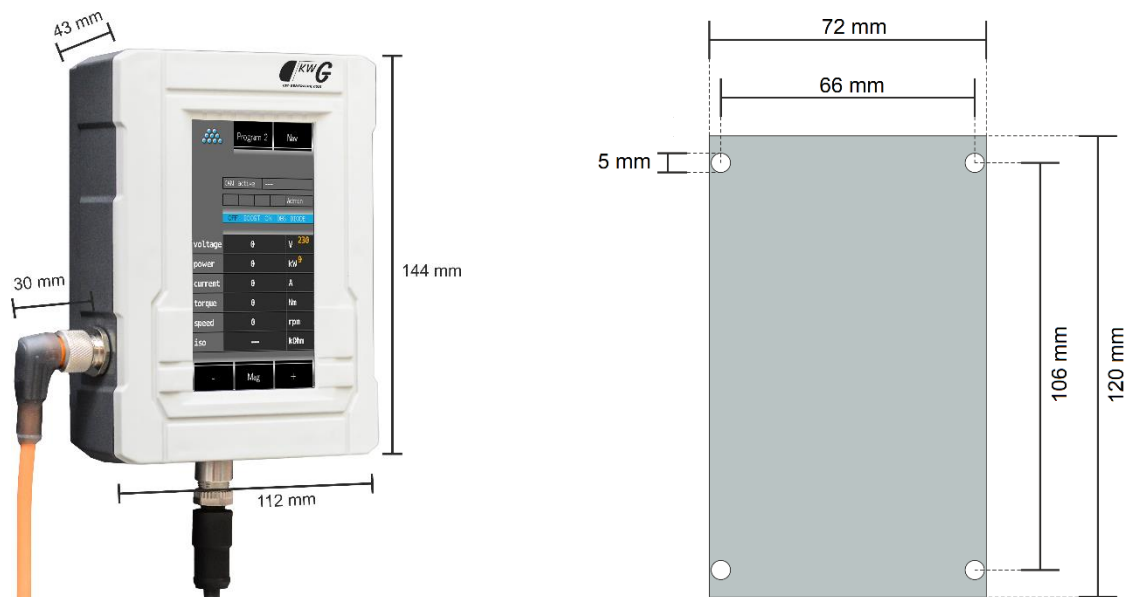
Dimensions of the *HMI control unit* and the metal plate
